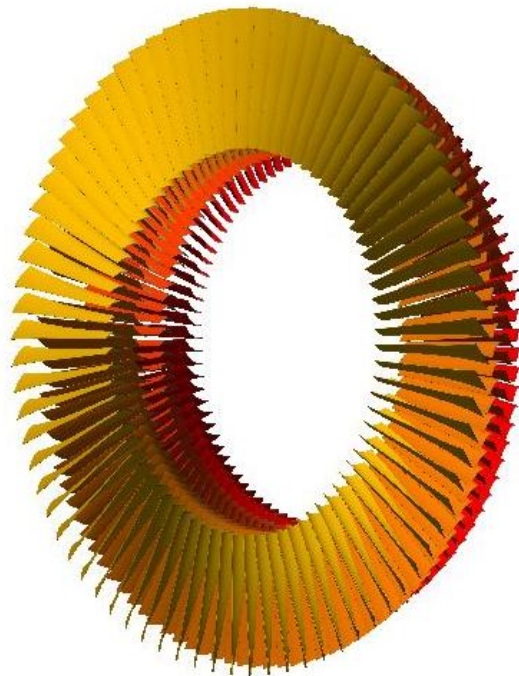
T-AXI three-spool LPT blading, exit view
